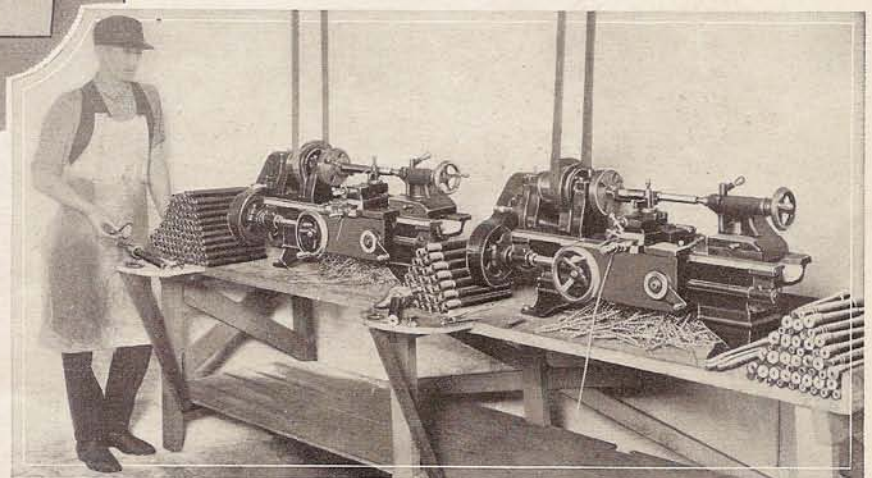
One Man Operating Two 9-inch Junior Bench Lathes on Production Work in a Manufacturing Plant
